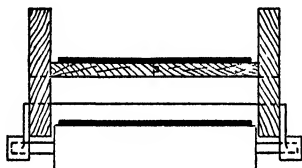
Conveyor Belt Sliding in Wood Trough, 1830.
